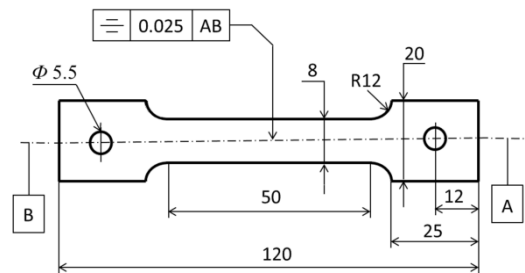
Dimensions of the sheet specimens with thickness of 1 mm (in millimeters).
